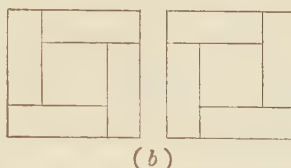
(b).—Arrangement of joints in adjacent lamination layers.
